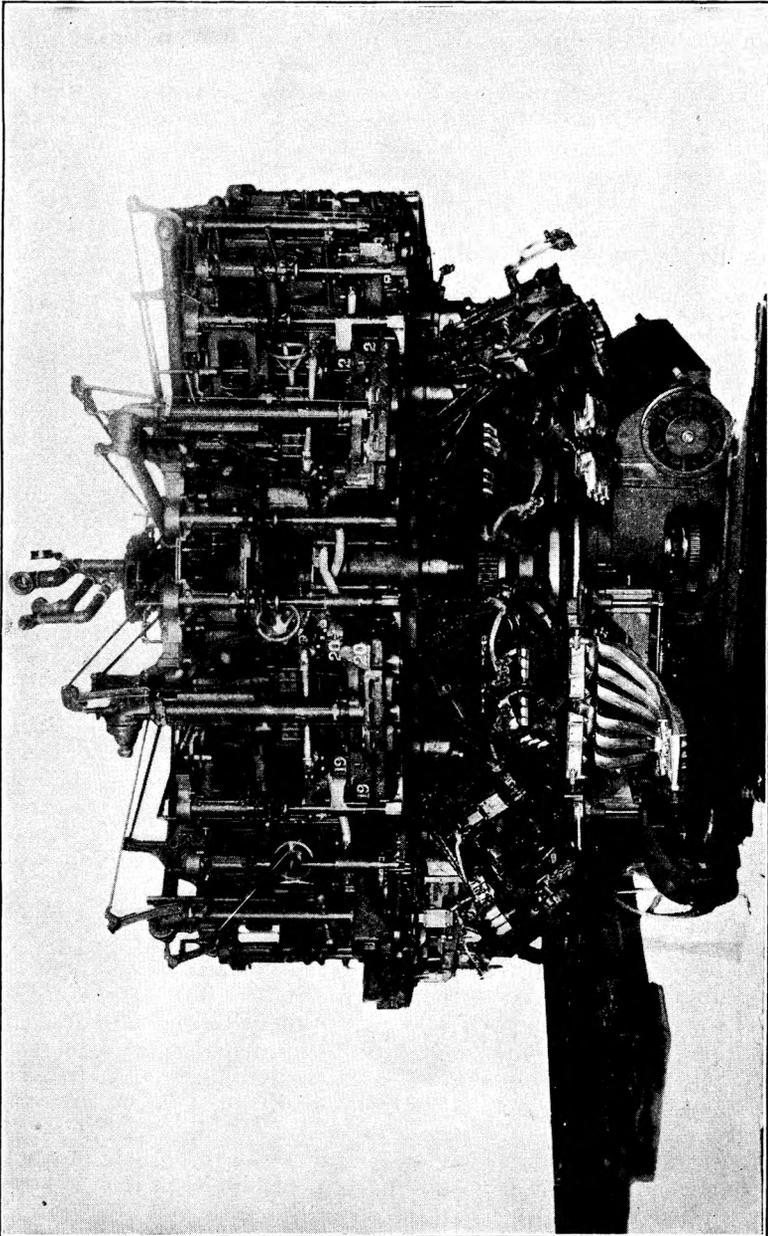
OWENS C. A. AUTOMATIC MACHINE (10 ARMS×2 HEADS×3 MOLDS=60 BOTTLES PER REVOLUTION
